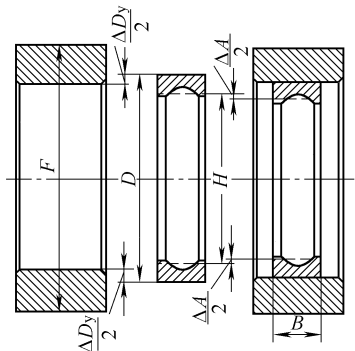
15 Geometric dimension after matching outer ring to housing bore
